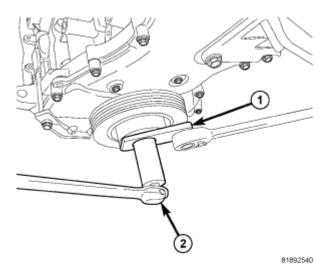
DAMPER REMOVAL Courtesy of CHRYSLER LLC
